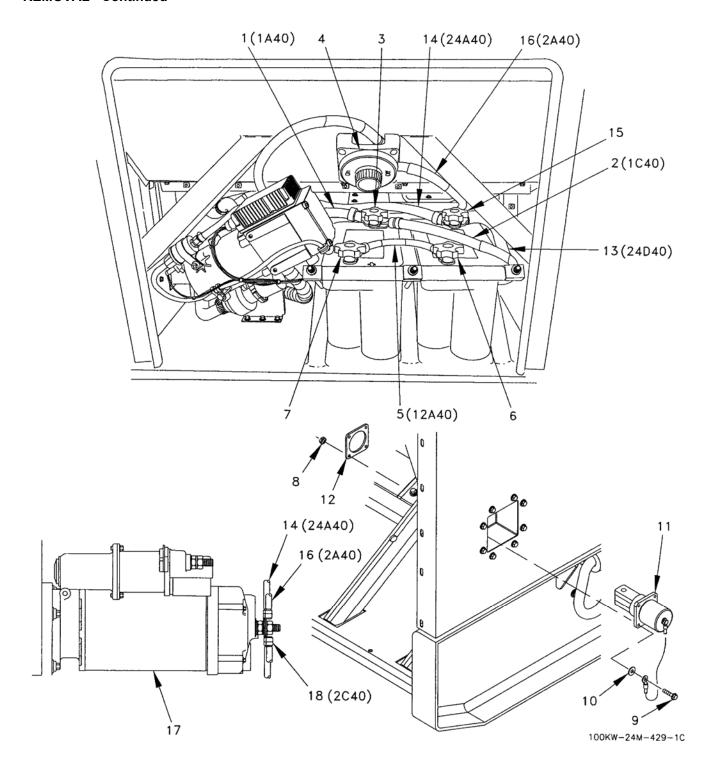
Battery Cable Assemblies (Sheet 1 of 2).
